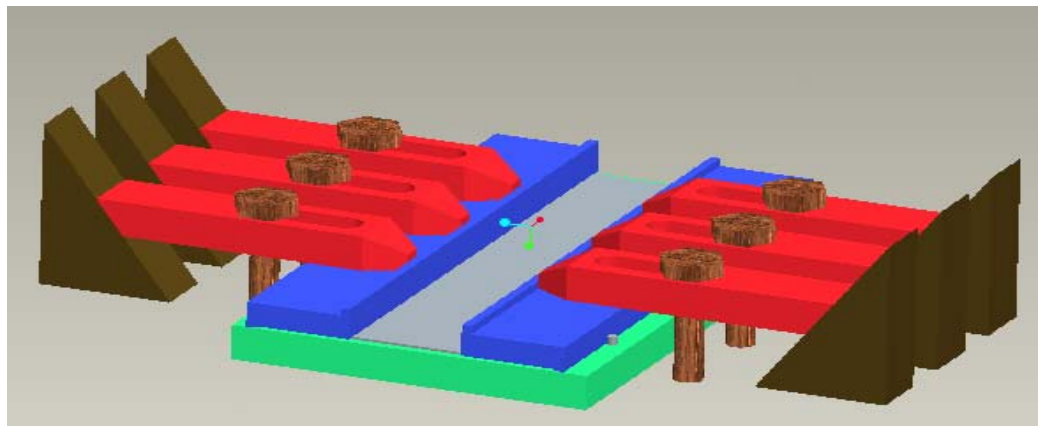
Model of Final Design for Friction Stir Welding Fixture
